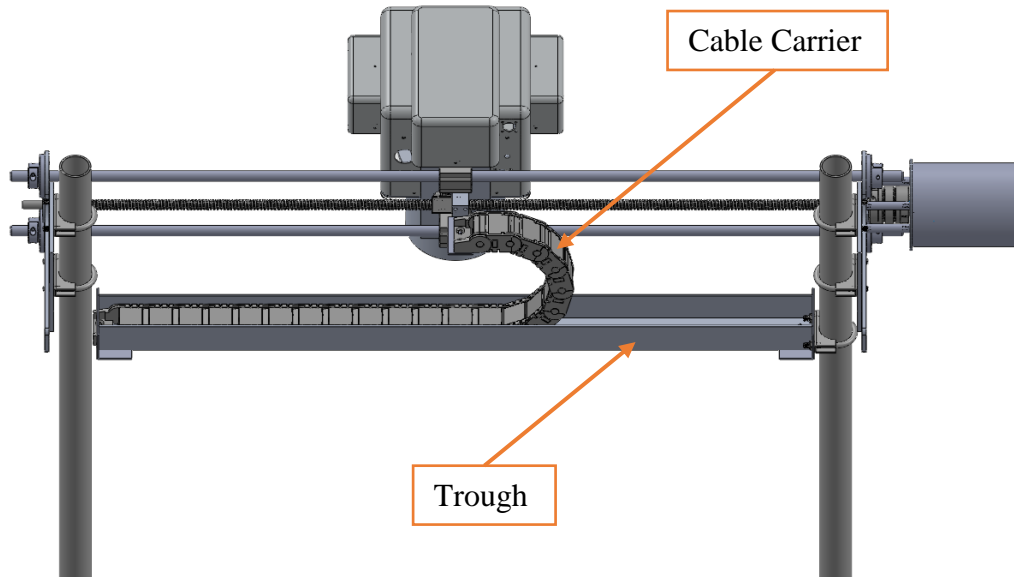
Cable carrier providing protection and support for the GVR cables. The carrier is supported by a trough. Not shown are the various cables from the GVR.
